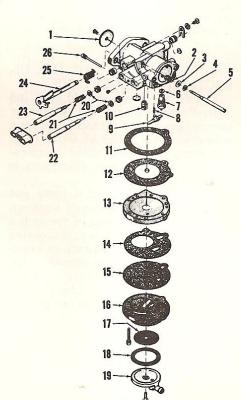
Exploded view of Tillotson HL model carburetor used on 450, 550 and NU17 models.
